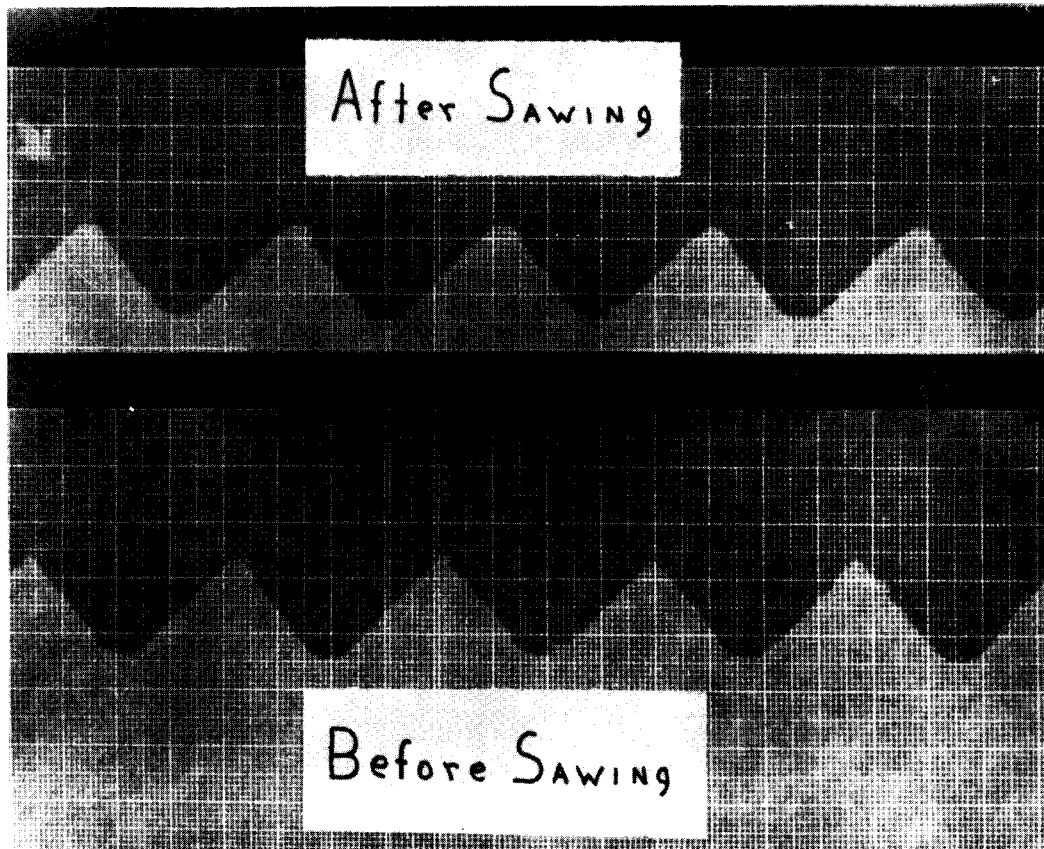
Photograph of saw blade images taken before and after sawing. The smallest units are in millimeters.
